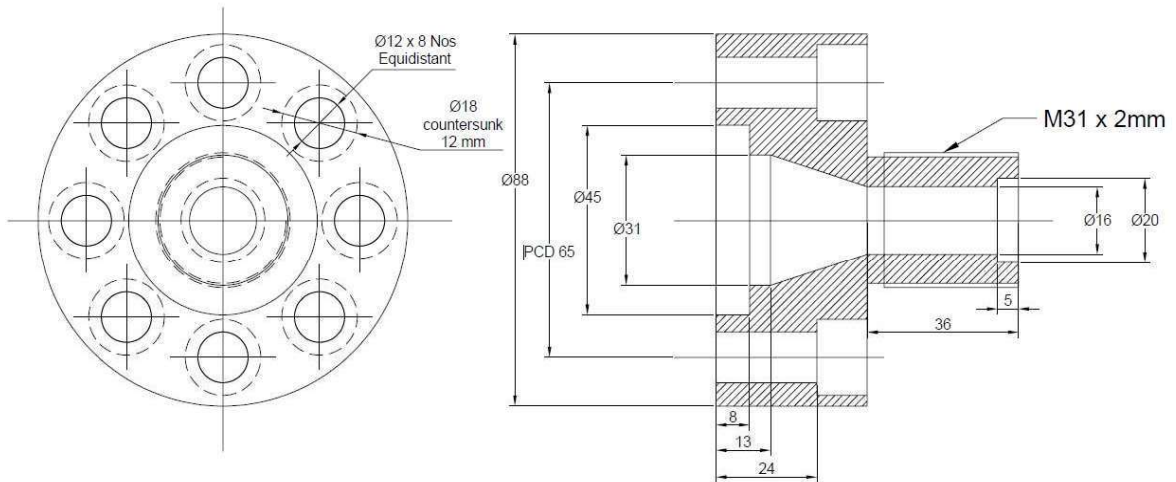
Nozzle barrel connector (all dimensions are in mm).
